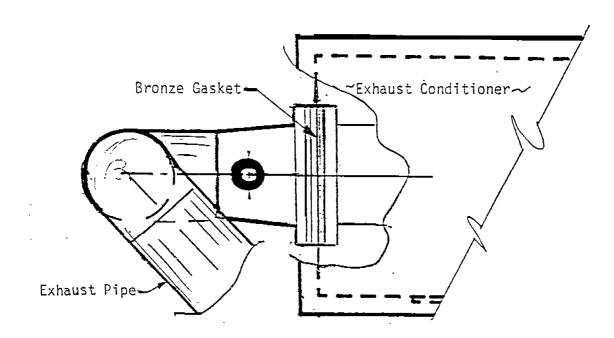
Gasket Between Exhaust Conditioner Flange and Scrubber Insert Flange.
